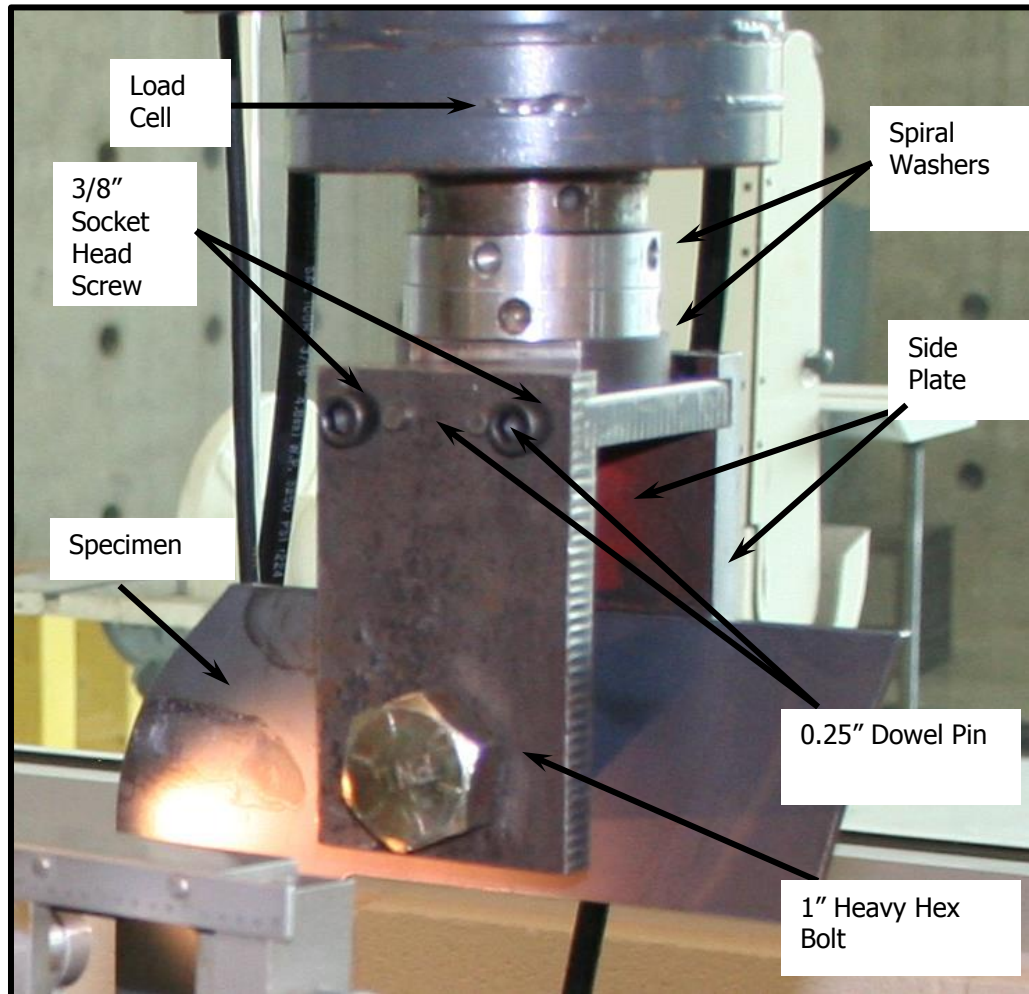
The top test fixture designed for the closed loop hydraulic test system.
